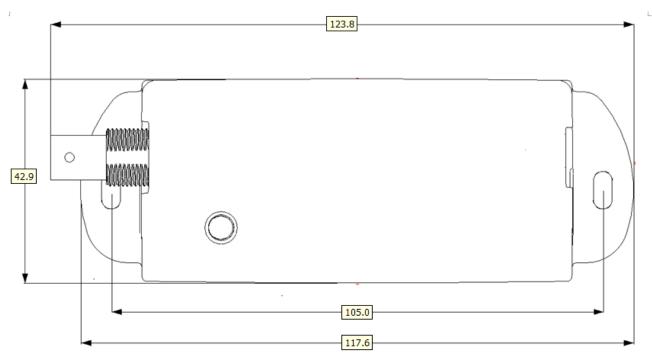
LDSBus pH Sensor Adapter Dimension – Top View
